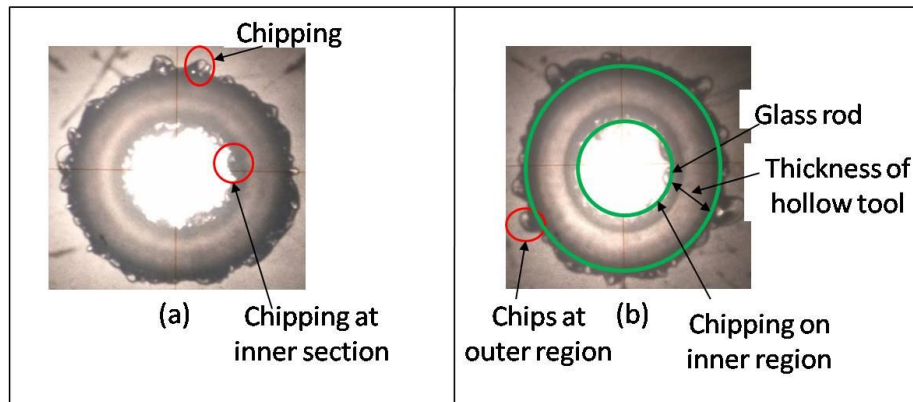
Chipping images of machined blind holes by the hollow abrasive tool (a) Blind hole by CD (b) Blind hole by RUD
